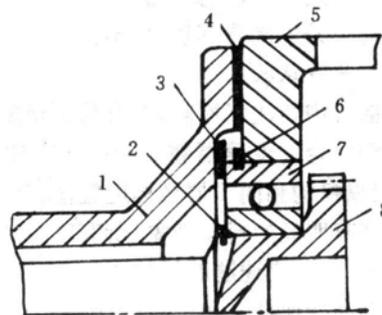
Adjusting of axial clearance of first shaft of transmission
